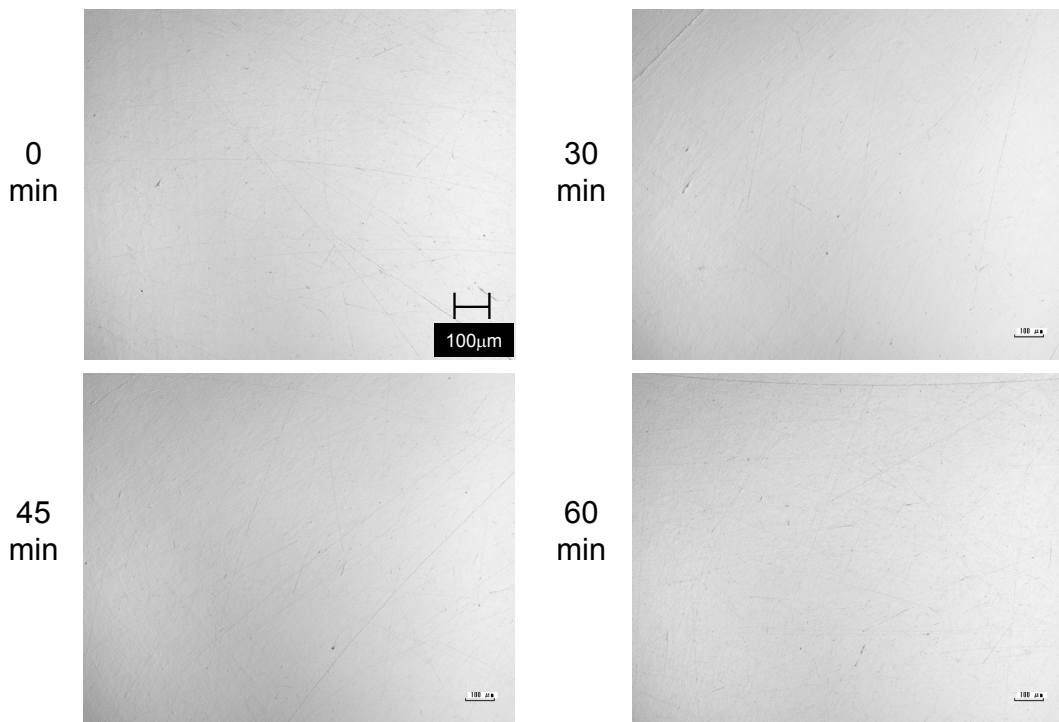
Surface of workpiece at the peripheral part ( # 2000 )
